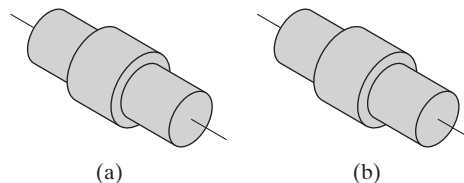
Two parts of identical shape and size but different manufacturing requirements: (a) 1,000,000 pc/yr, tolerance = ± 0.010 in., material = 1015 CR steel, nickel plate; and (b) 100 pc/yr, tolerance = ± 0.001 in., material = 18–8 stainless steel.
